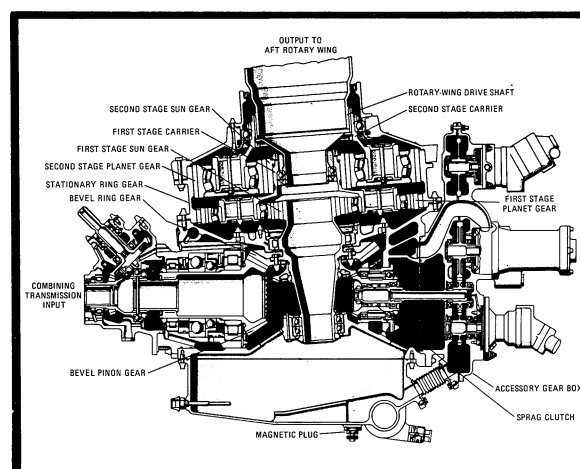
Courtesy The Boeing Co., Vertol Division.
